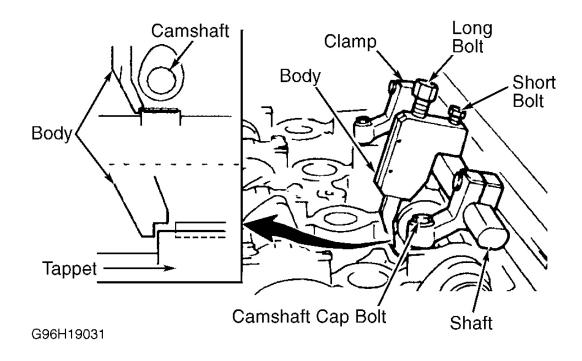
Aligning Adjustment Tool Clamp & Shaft Courtesy of MAZDA MOTORS CORP.
